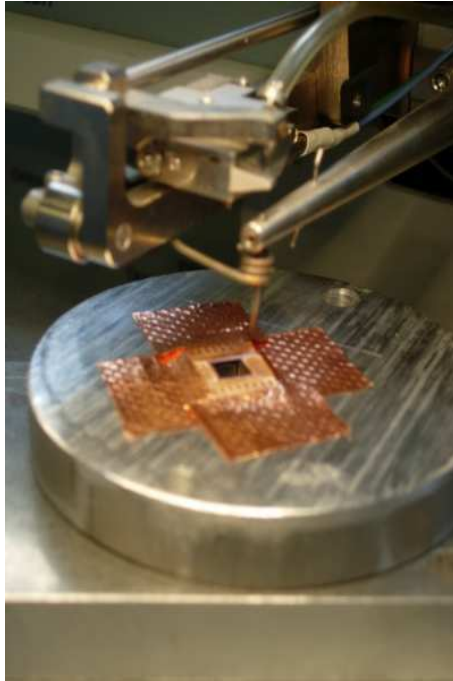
Bonding the sample contacts to the sample holder with the ultrasound soldering machine.
